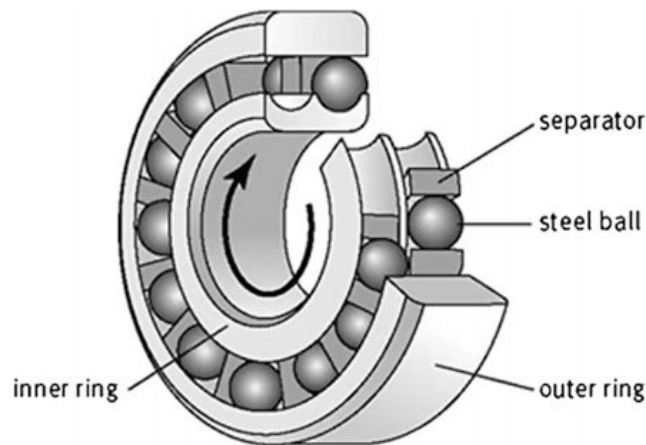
Dissection of a typical ball bearing showing its major parts [6].
